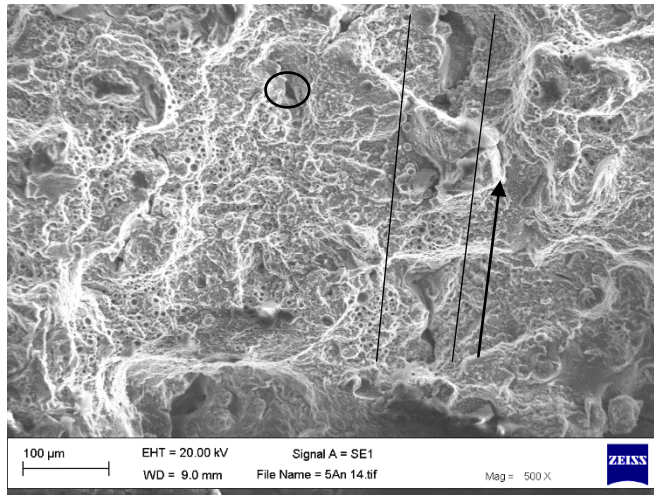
Fracture surface of 5%-SR Al-MMC
